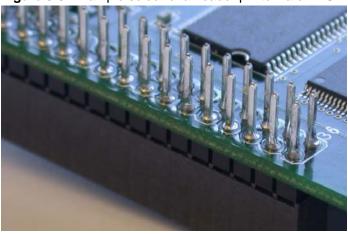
Example solder of a header pin to via on NGW100 PCB
